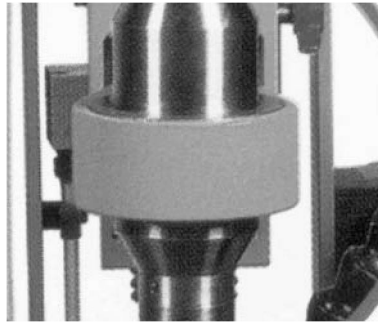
Amplitude coupling for compact 500W USM machine [58].
